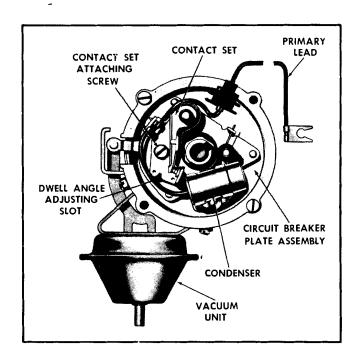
E-42 Top View of Distributor (Cap and Rotor Removed)
